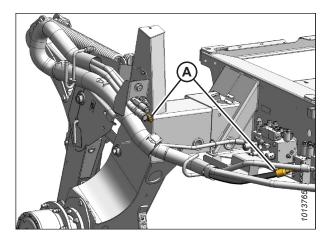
Auger Header Drive and Draper Header Reel Drive and Lift Plumbing Kit (B4651)
